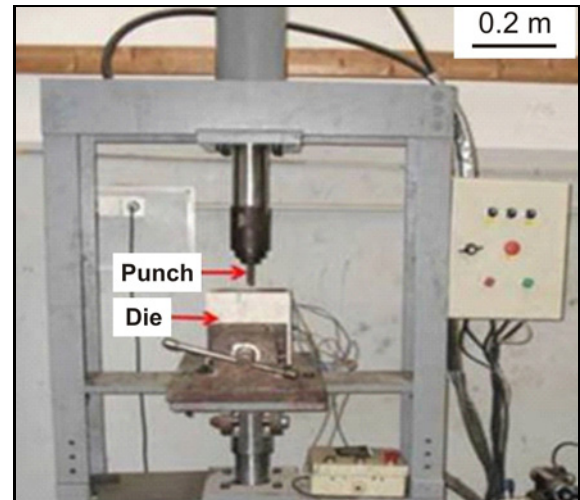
Experimental setup with steel mold used in the squeeze casting process.
